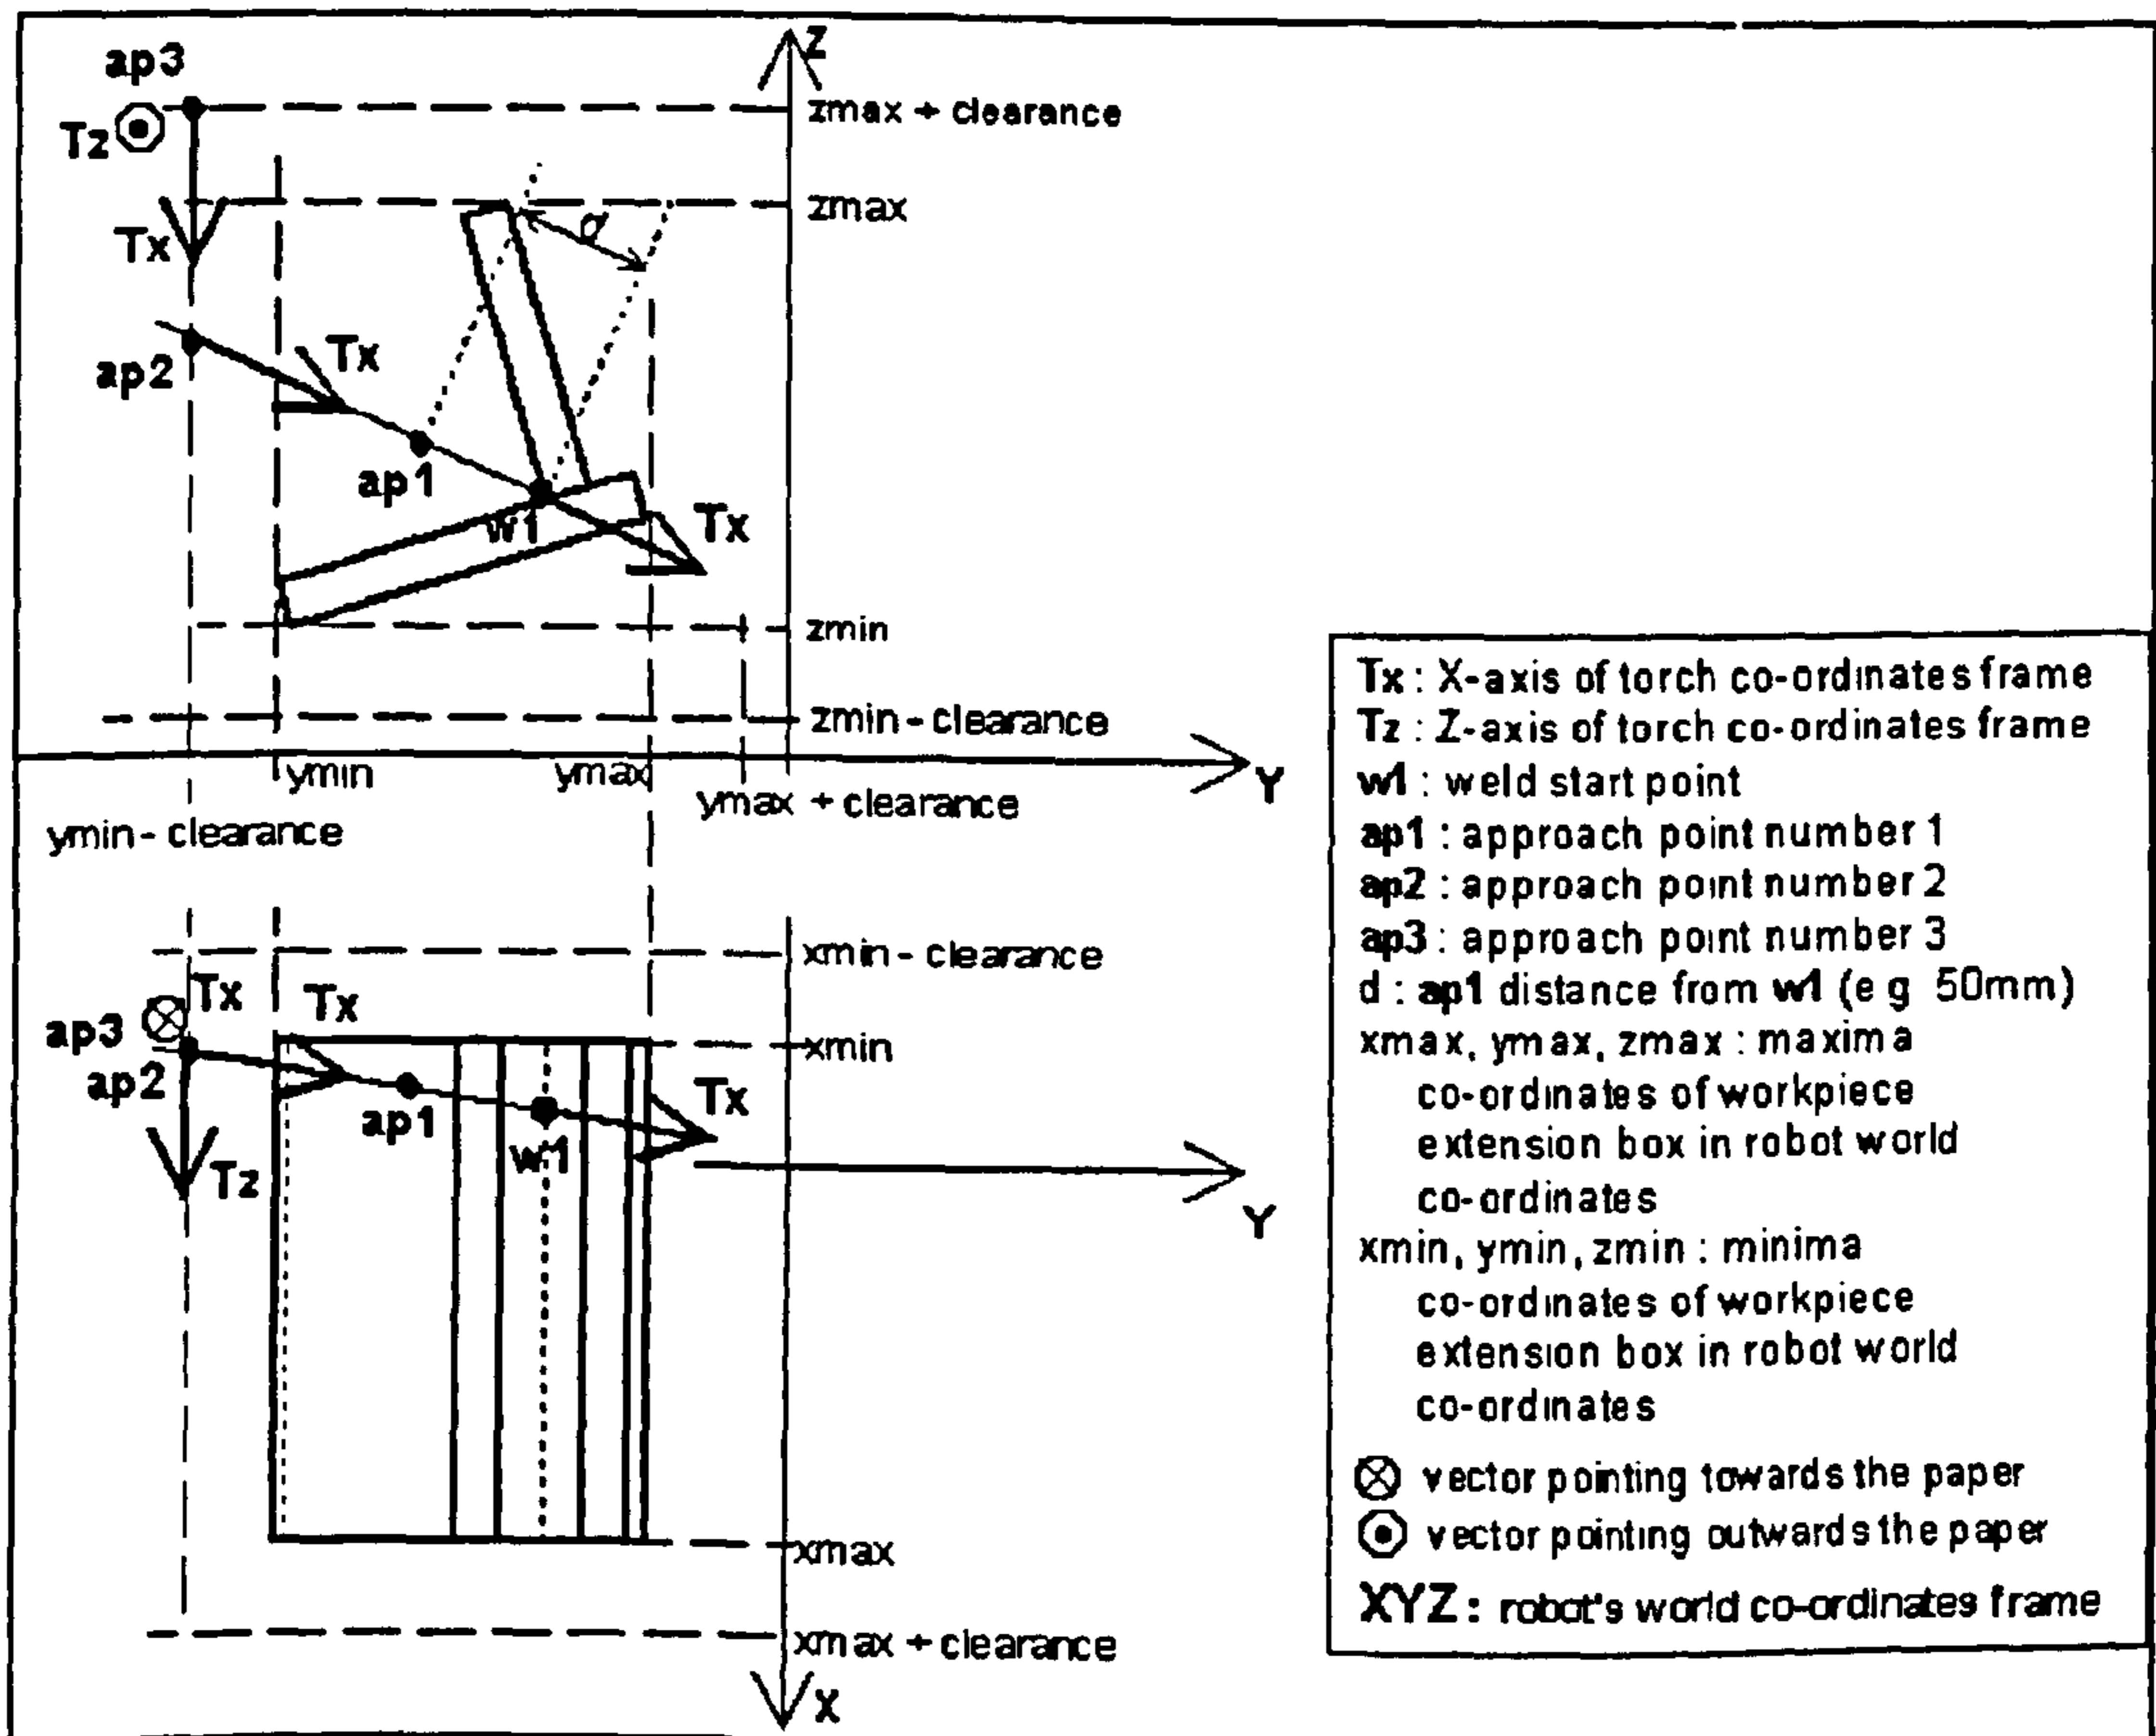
Method used to determine the weld approach and withdrawal points
